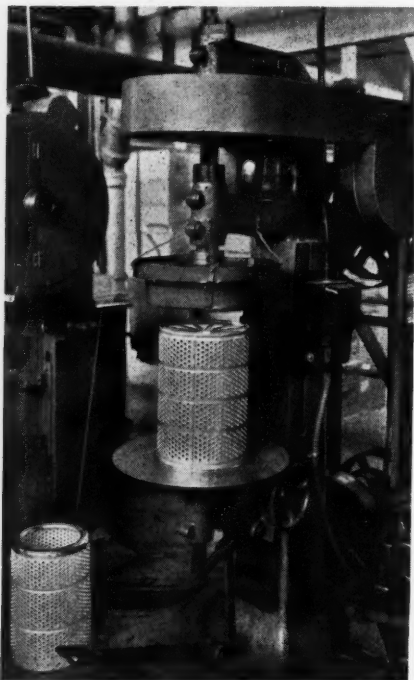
Niagara special machine used for flanging over and rolling beading on bottom of centrifugal dryer basket.
